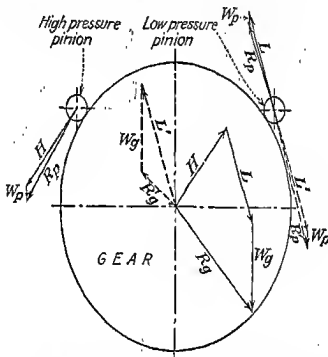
Graphical determination of bearing loads for second reduction gears driven by high- and low-pressure turbines.
